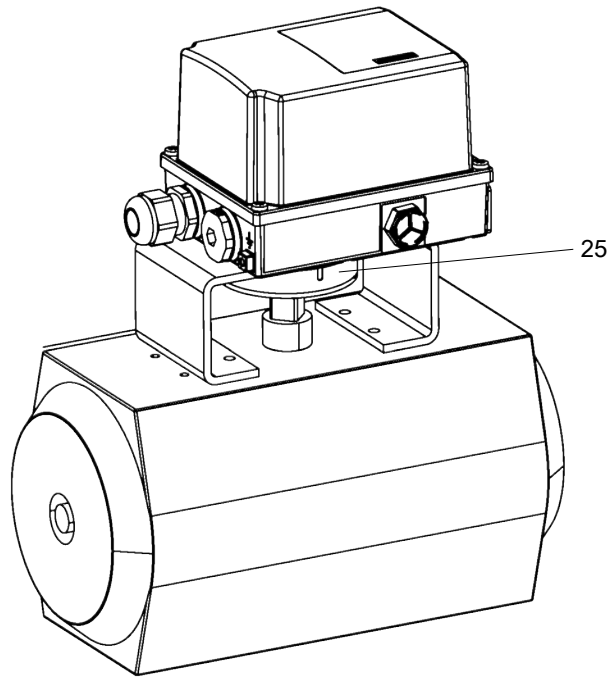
Positioner with mounting bracket fitted on rotary actuator
